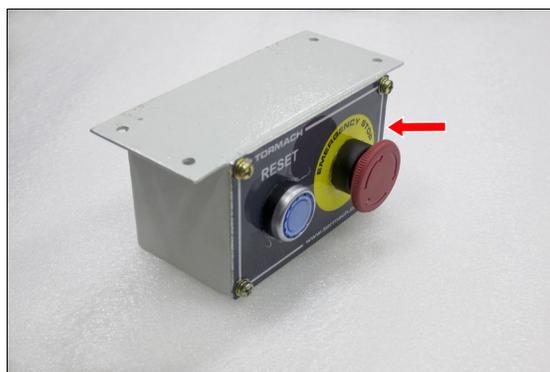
Example of the Emergency Stop button locked in the disabled position.
